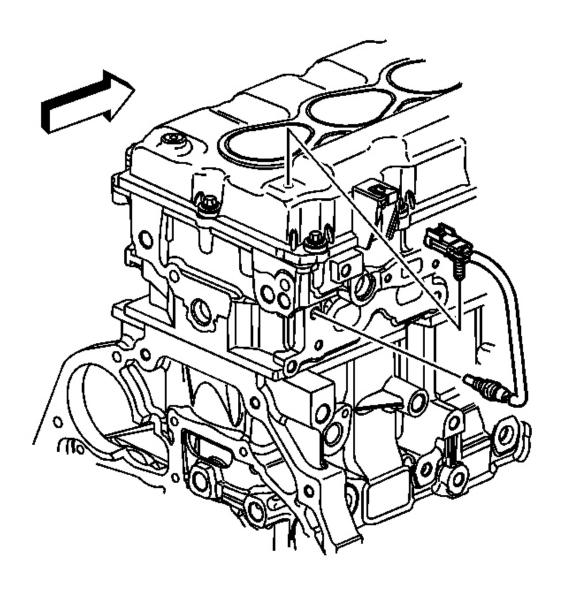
View Of Coolant Temperature Sensor Courtesy of GENERAL MOTORS CORP.
